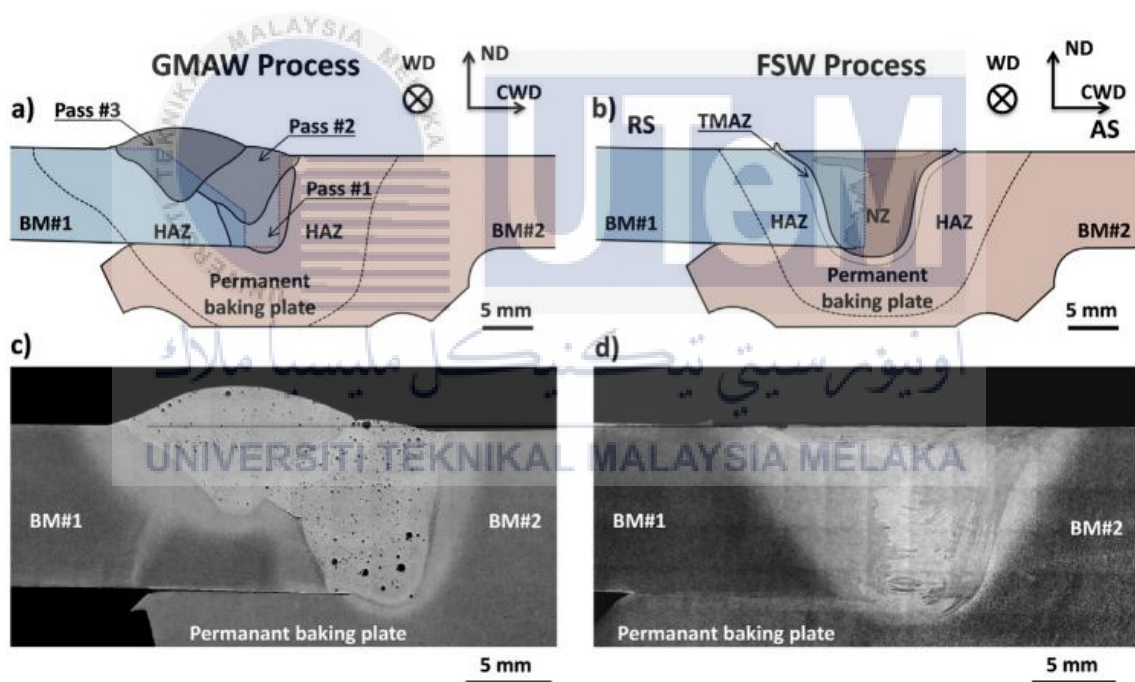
Comparison HAZ of welding between GMAW and FSW welding.
